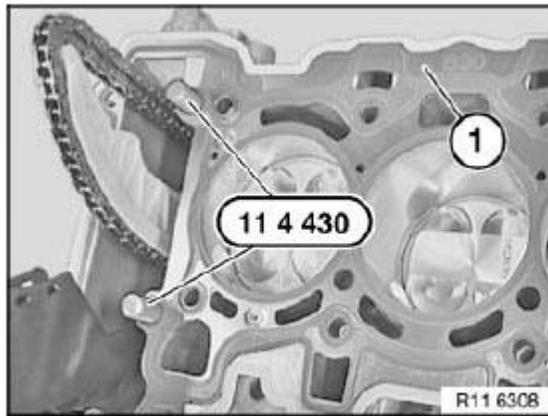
Inserting Special Tool 11 4 430 Into Bores
